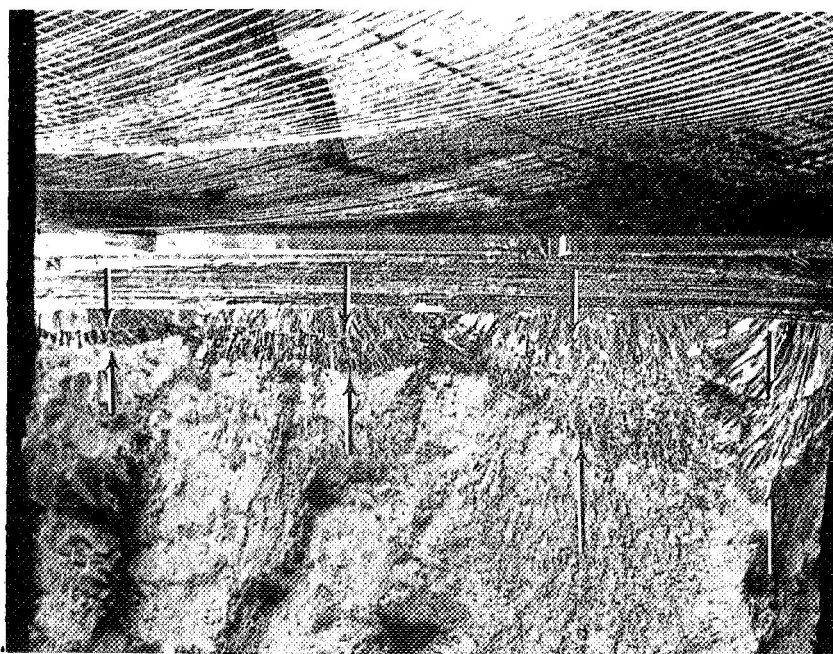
Fracture Face of Al X7007-T6 Compact Tension Specimen Showing Sustained Load Crack Growth along Entire Crack Front
